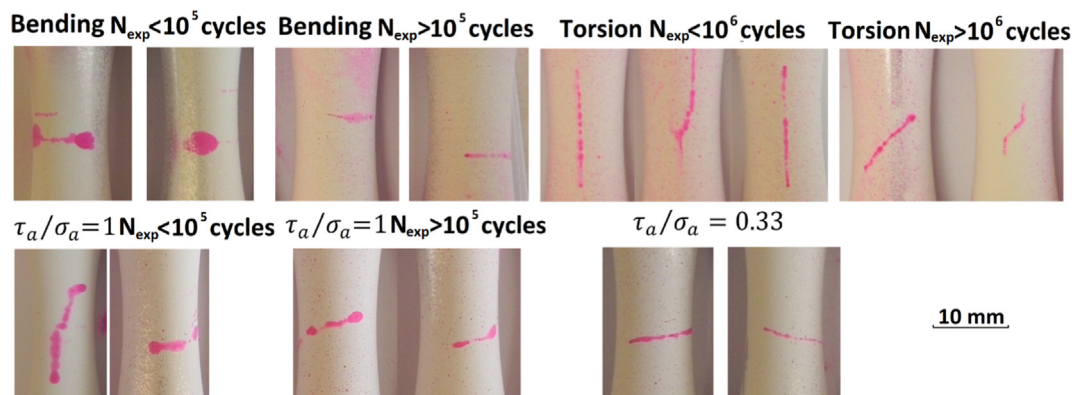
Photos of fatigue cracks under cyclic bending, torsion and combined bending-torsion loading on 2124T851 Al alloy.
